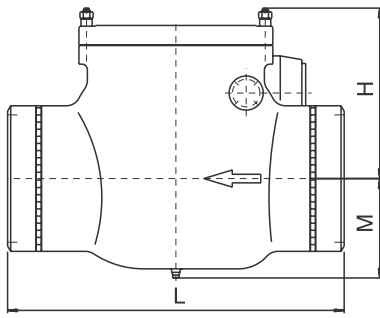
Drawing with welding ends and pneumatic/hydraulic actuator
